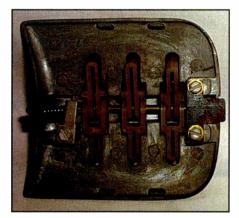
Photo G. Rear view of the preset station selector keyboard assembly. This set comes from the author's 118474.
